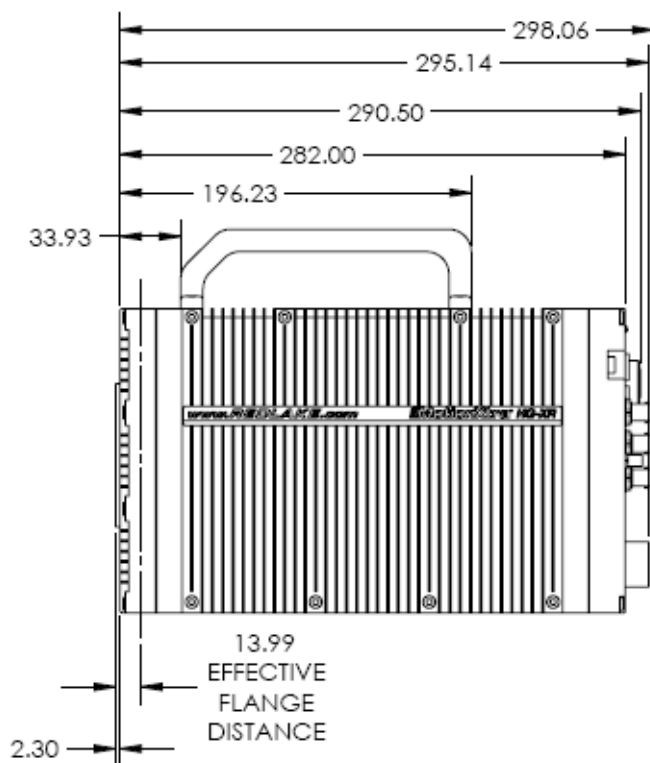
HG-XR/XL dimensions, side (in mm)
